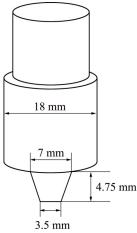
Schematic diagram of friction stir welding tool used in this work
